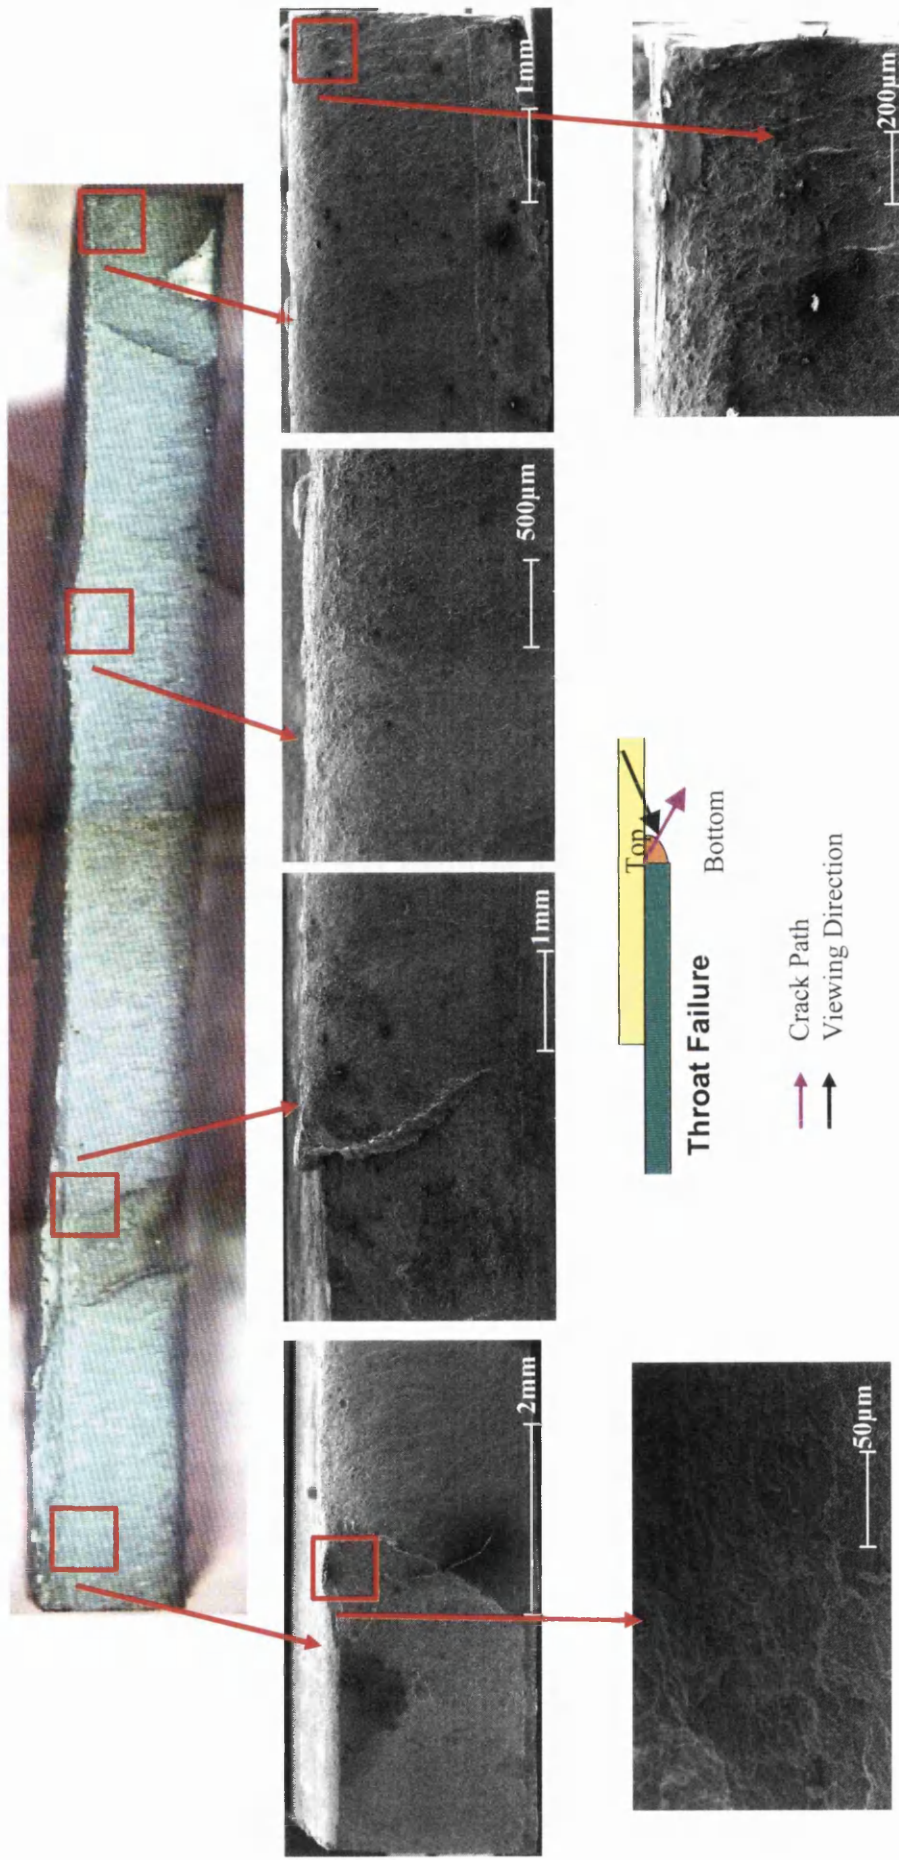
Typical Fracture Surface for GM4 Weld Throat Failure – Sheet View
